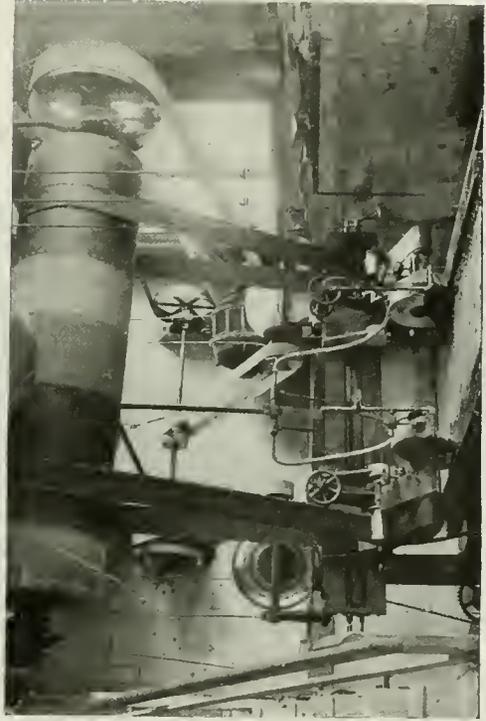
Carborundum Machine in Operation driven by a 20-h.p. motor
